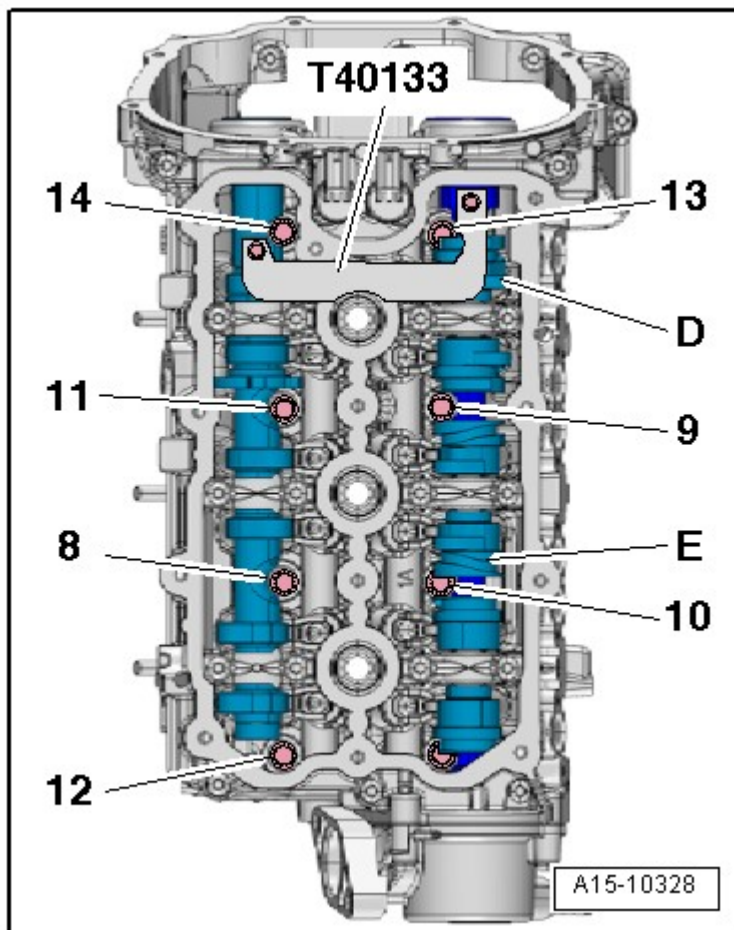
Identifying Unloaded Camshaft Slider & Bolts (Right Cylinder Head)
